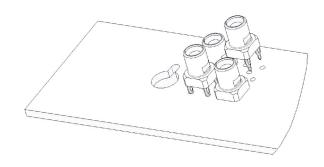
SMPM PCB Mount Plug with EON Contacts on a VITA 67 Backplane.
